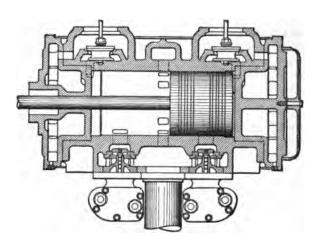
SKINNER UNAFLOW ENGINE CYLINDER.
